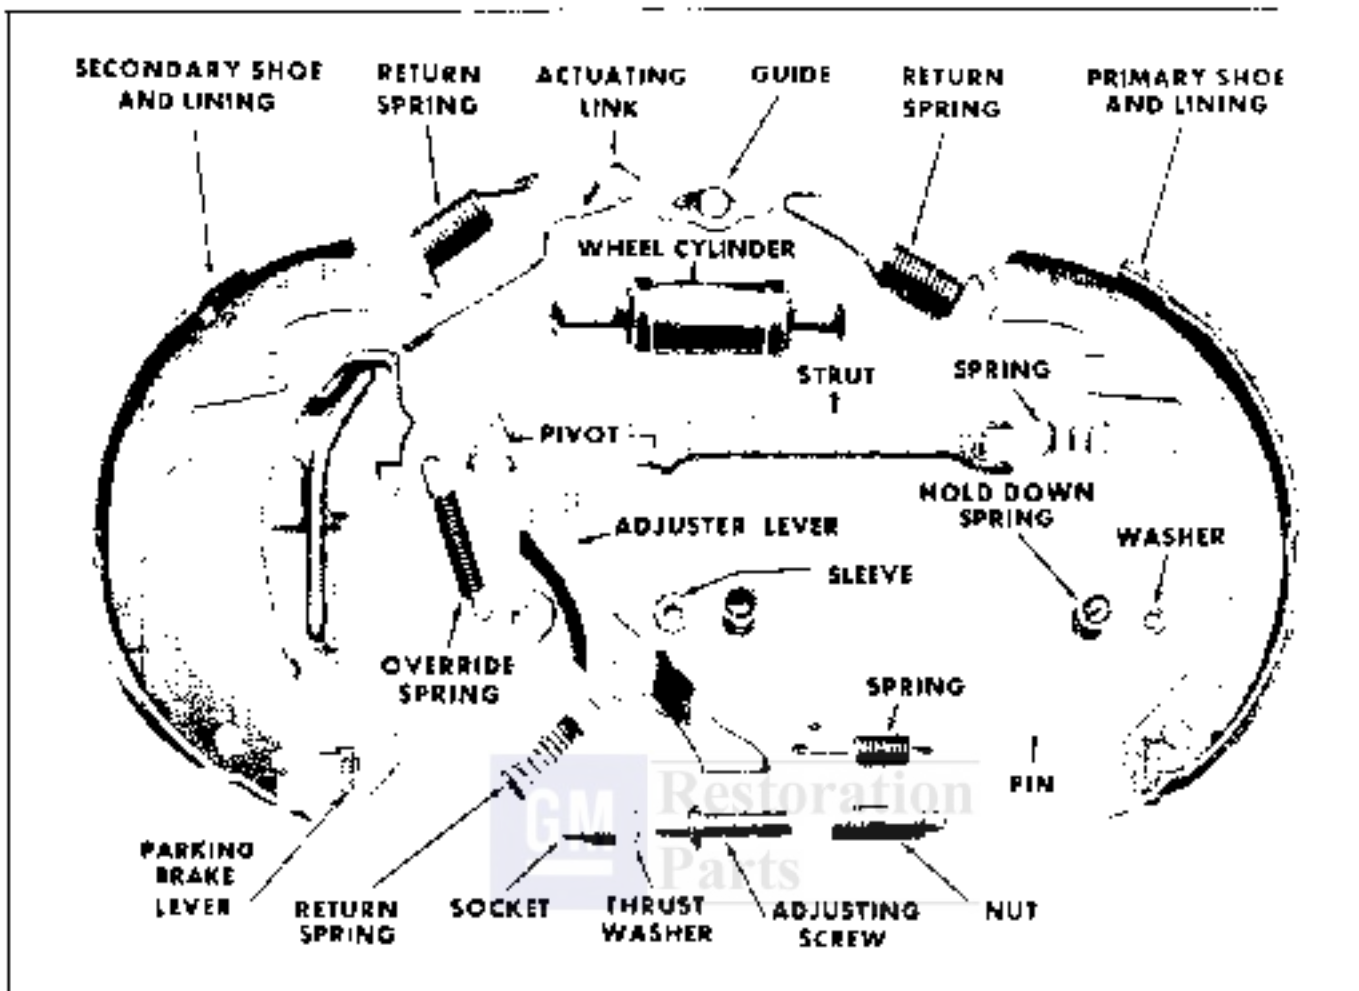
Typical Self Adjusting Brake Assembly — Exploded View — Right Hand Side Rear
